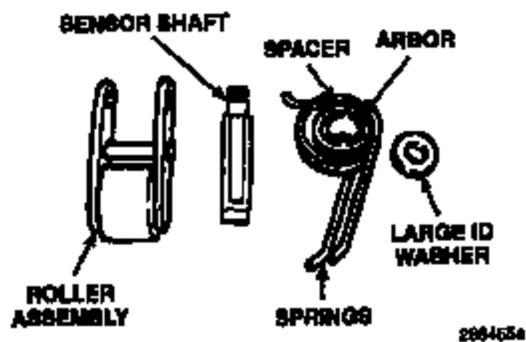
Roller, Sensor Shaft, Spring Pack Assembly
